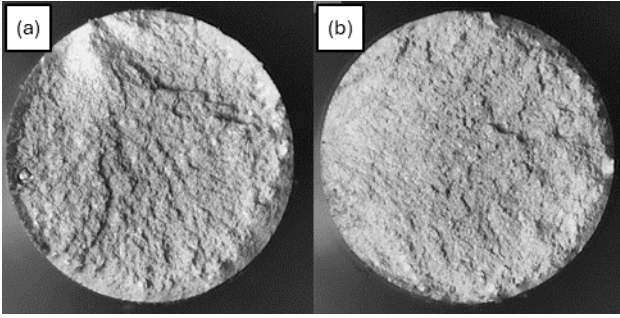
R=0.1 direct-HIP 2009/SiC/15p axial fatigue fracture surfaces for coupons failing at (a) 1.1×10^4 cycles, and (b) 2.3×10^6 cycles.
